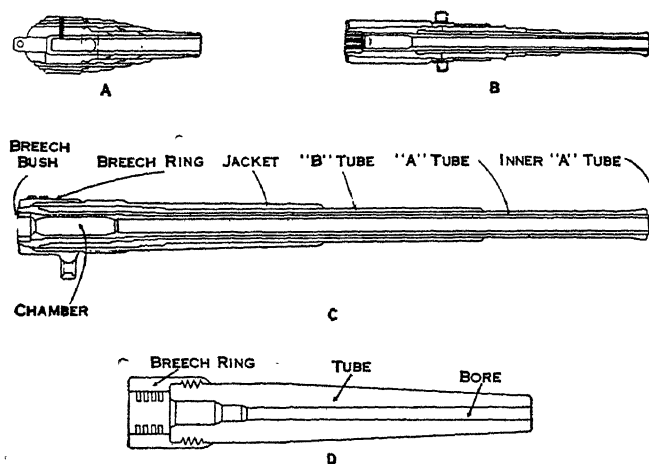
(A) MUZZLE-LOADING 12-IN. GUN OF 1864. (B) BREECH-LOADING 9.2-IN. GUN OF 1887 (SHRUNK HOOPS-STEEL). (C) 6-IN. STEEL GUN SHOWING CONSTRUCTION. (D) MONOBLOC TUBE
